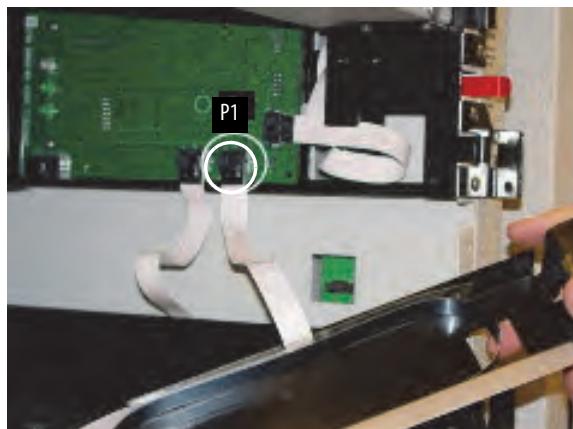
Disconnecting the rail cable from the carrier controller board
